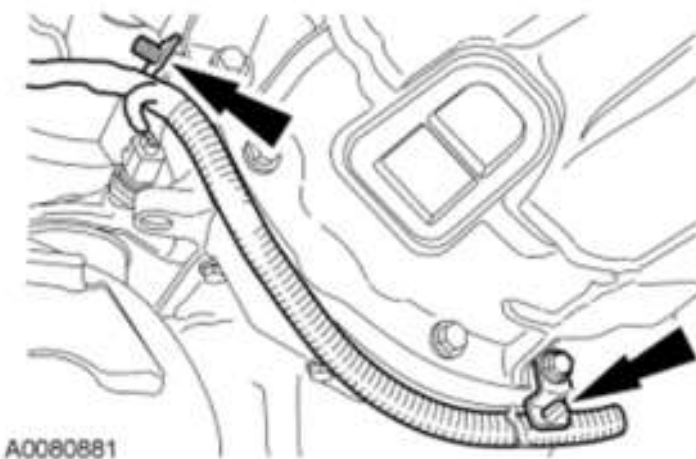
Locating Engine Wiring Harness Anchor And Pin-Type Retainer
